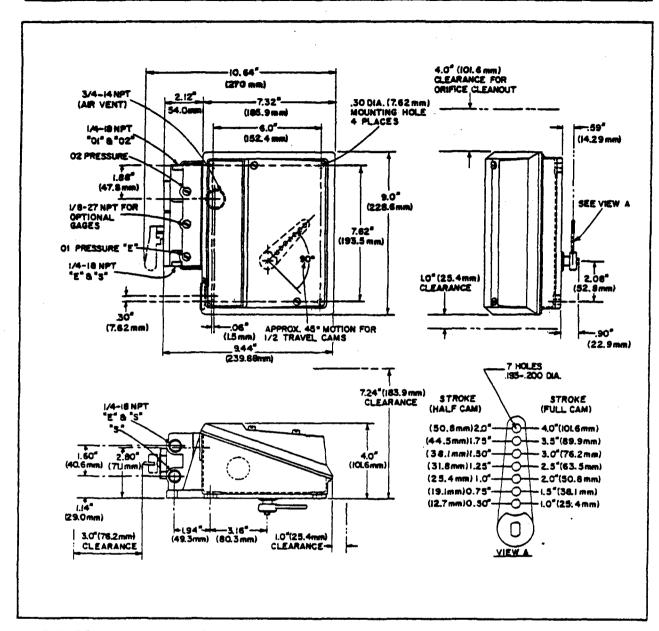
Mounting and External Dimensions of Type AP2 Characterizable Pneumatic Positioner
